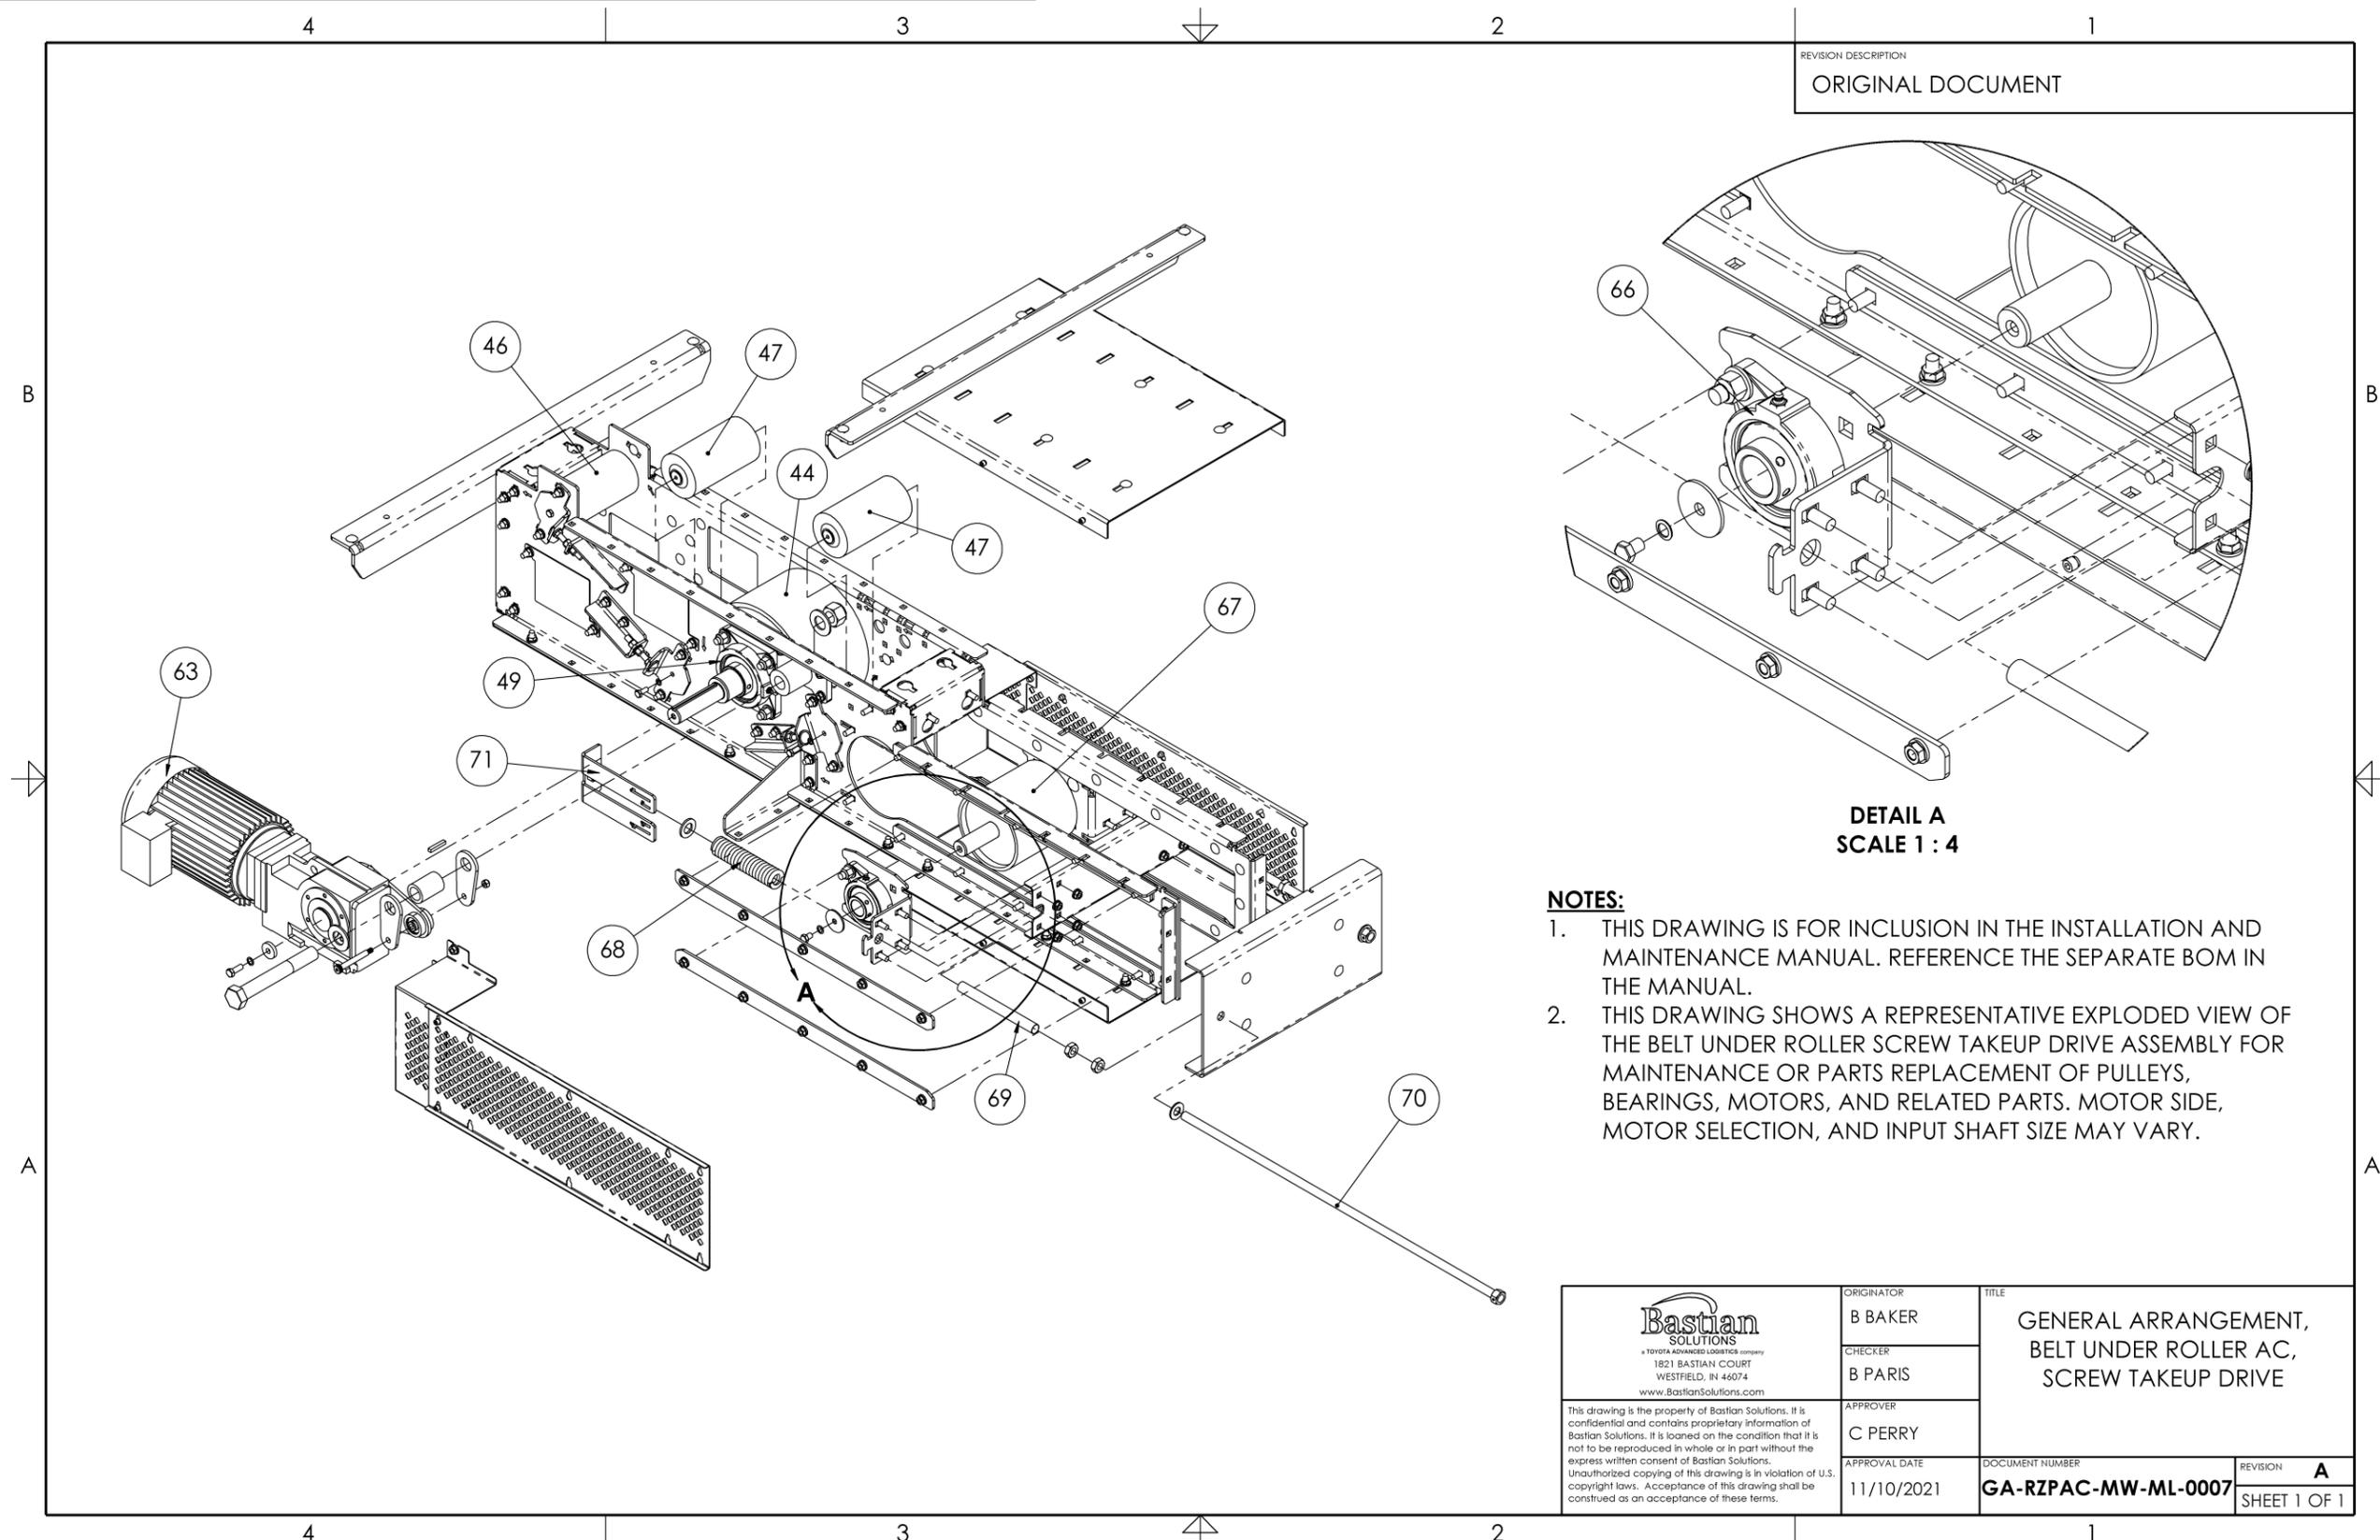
General Arrangement, Belt Under Roller AC, Screw Takeup Drive, Sheet 1 of 1
